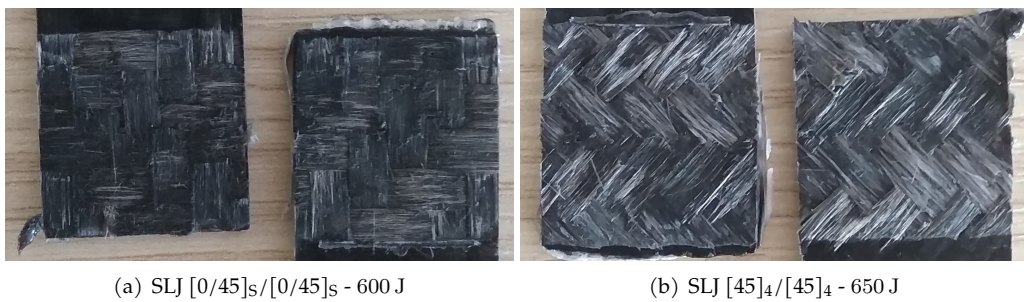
Post-fracture SLJ specimens - study on the welding energy
